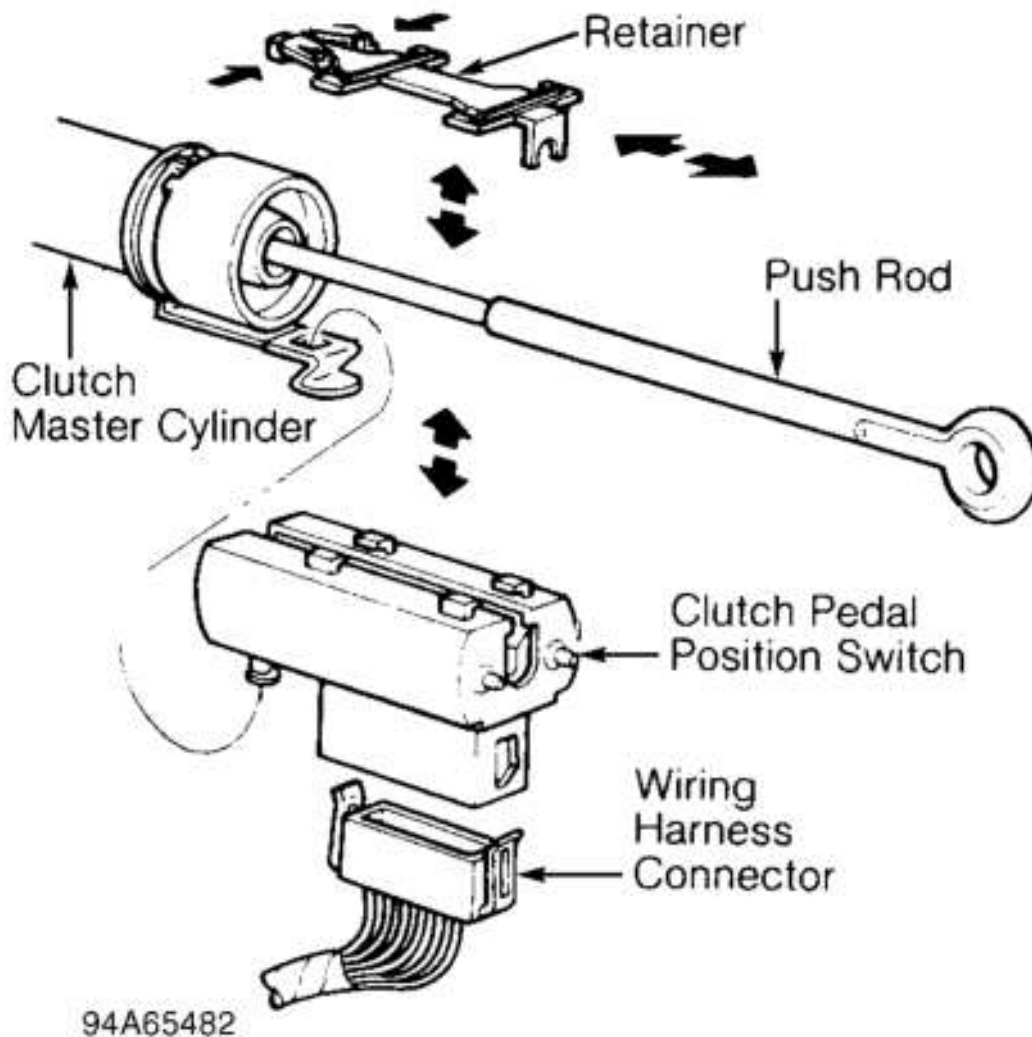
Identifying Clutch Pedal Position Switch & Components
